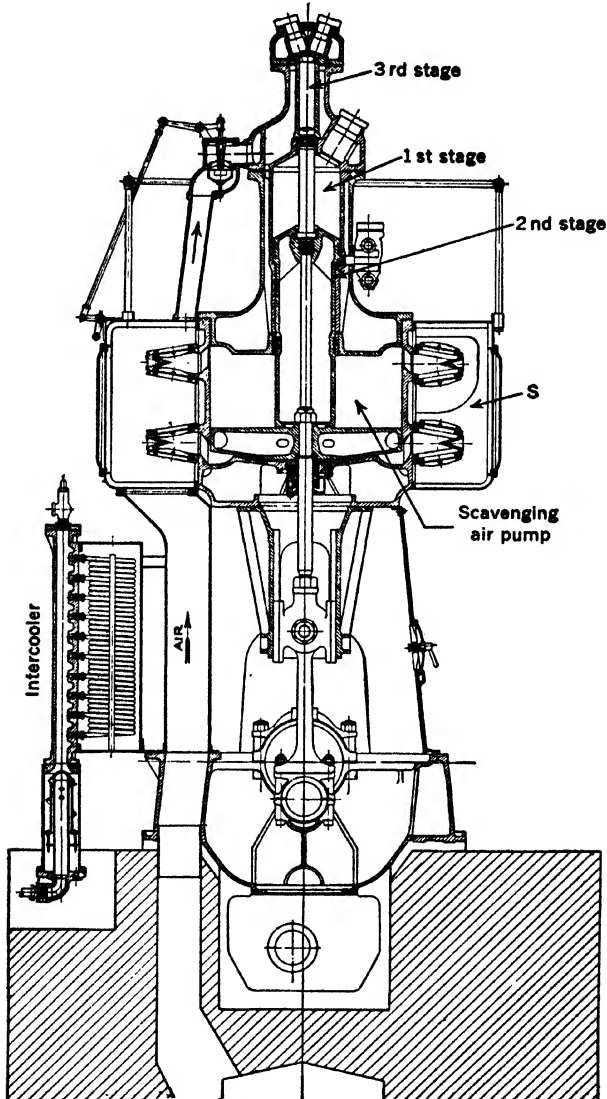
Section showing scavenging pump and three-stage air compressor for air-injection Diesel engine.
